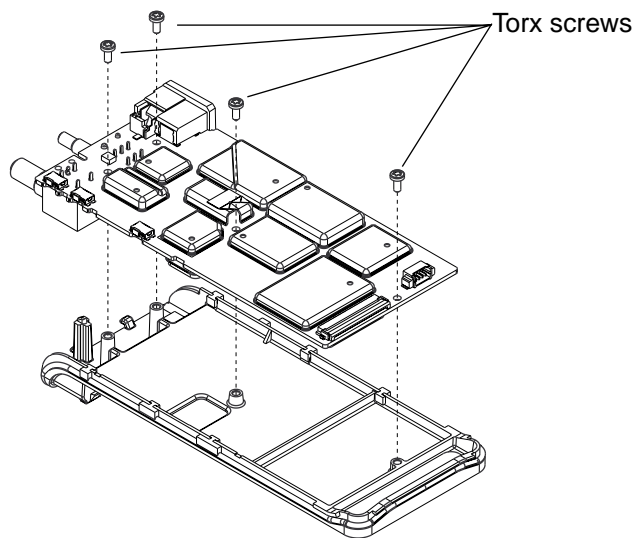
UHF/VHF Circuit Board Removal and Reinstallation
